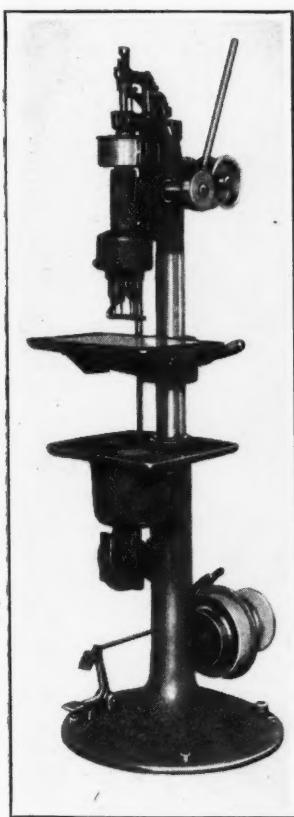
Machine for drilling Part shown at A, Fig. 1
